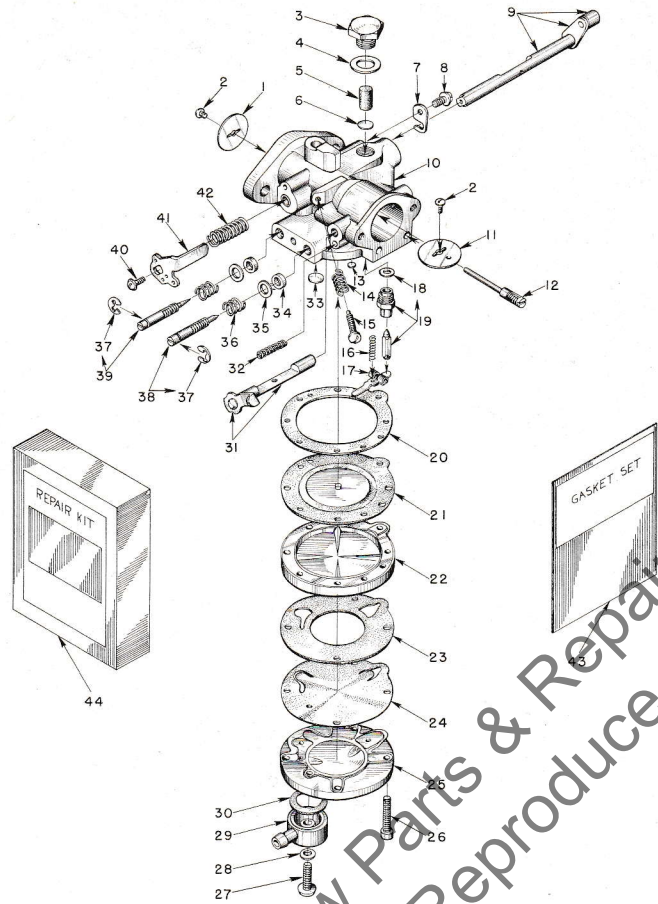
BROWN 1-CP CARBURETOR PARTS
